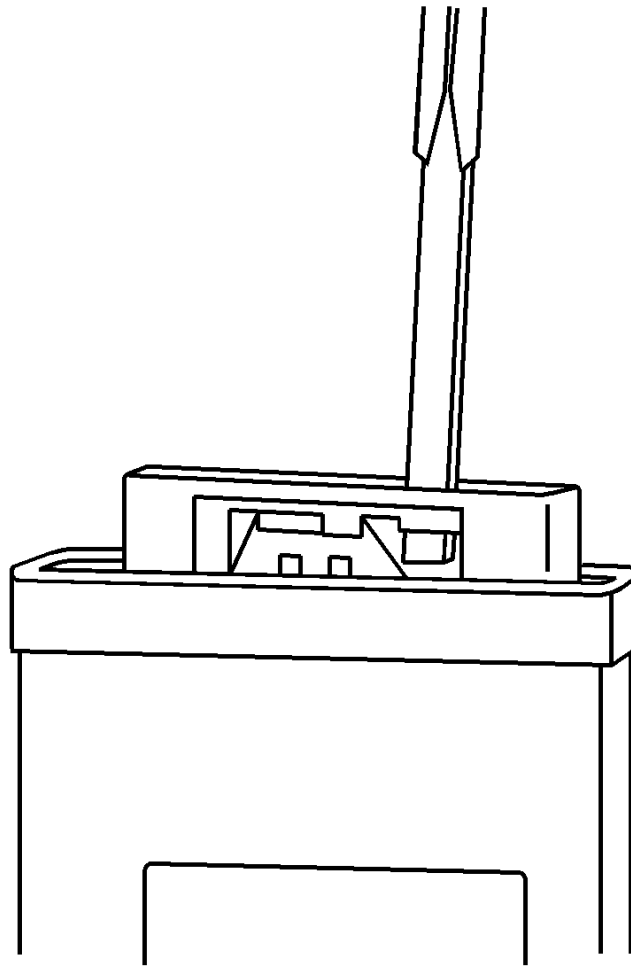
Pushing Wire Side Of Terminal Toward Connector
